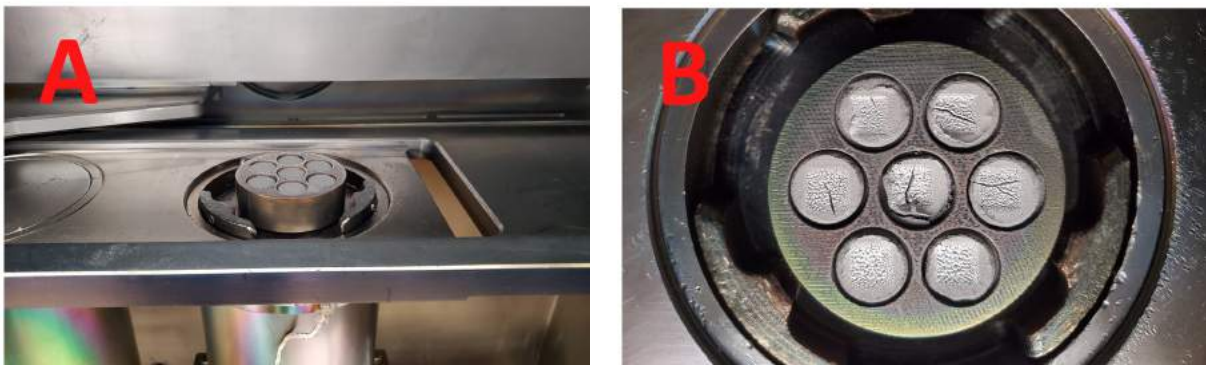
Custom socketed plate featuring A) pucks after pressing and B) pucks after melting.
